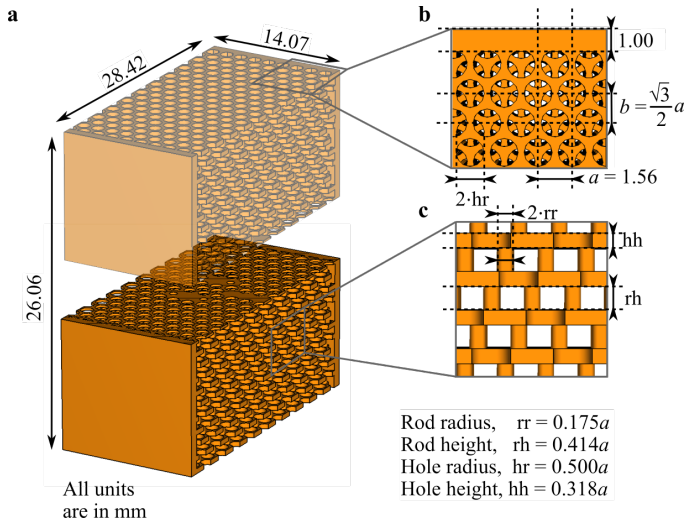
Dimensions of the 3D photonic crystal structure. (a) Overall dimensions. (b) Upper view, with the lattice constant a marked. (c) Side view of the photonic crystal.
